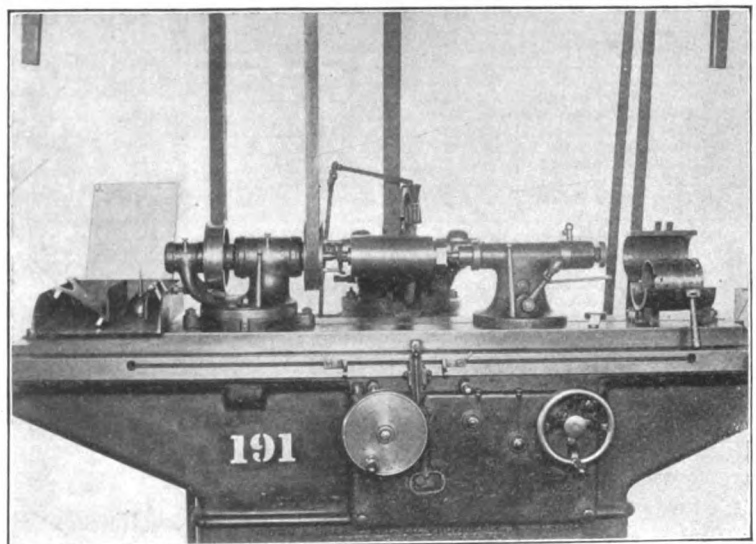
GRINDING FIXTURE FOR GAS-ENGINE PISTON RINGS
